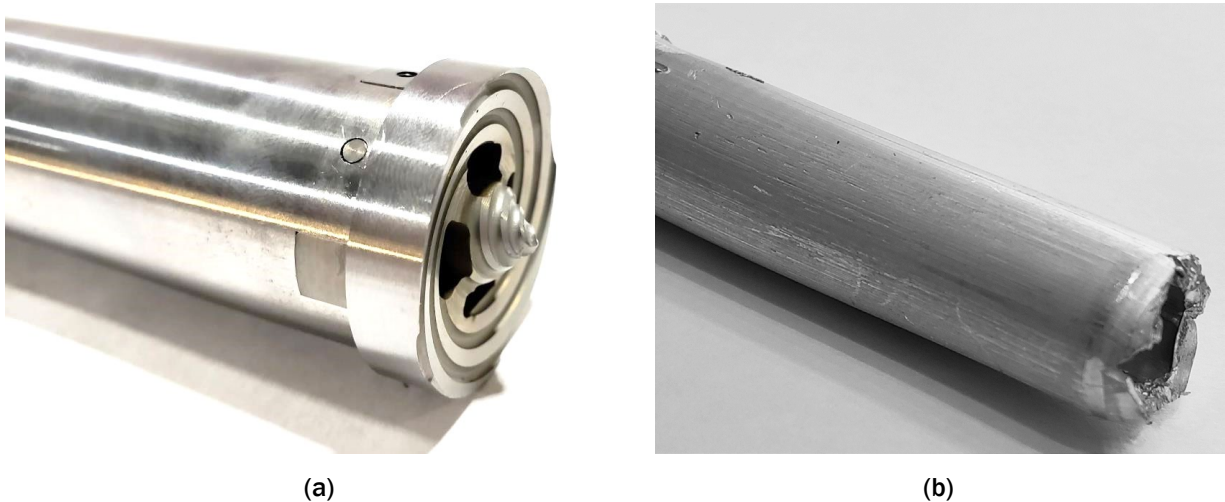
(a) Machined and assembled port-hole die. (b) 6063 tubing fabricated from cast billet using a port-hole bridge die. Source: PNNL.
